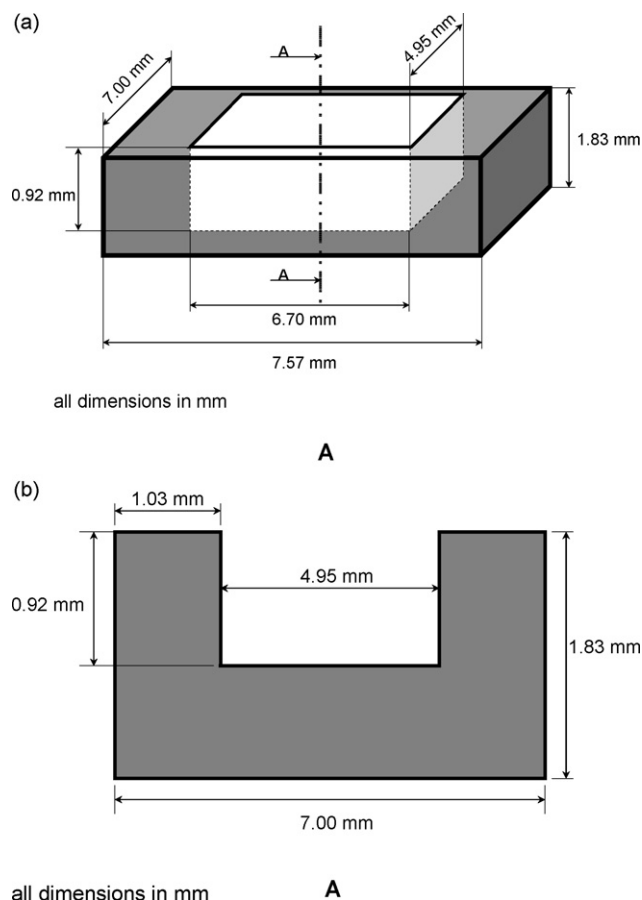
(a) Dimensions of IOS-2 package. (b) Dimensions of IOS-2 package (section A–A).
